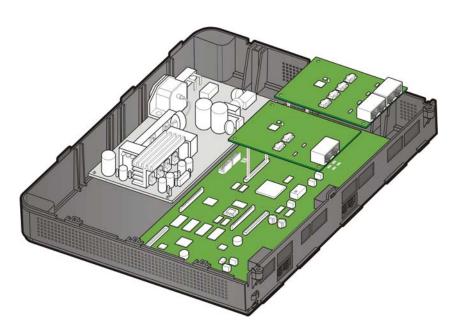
Mounting 4DM/4SM/4LM on the Base Board
